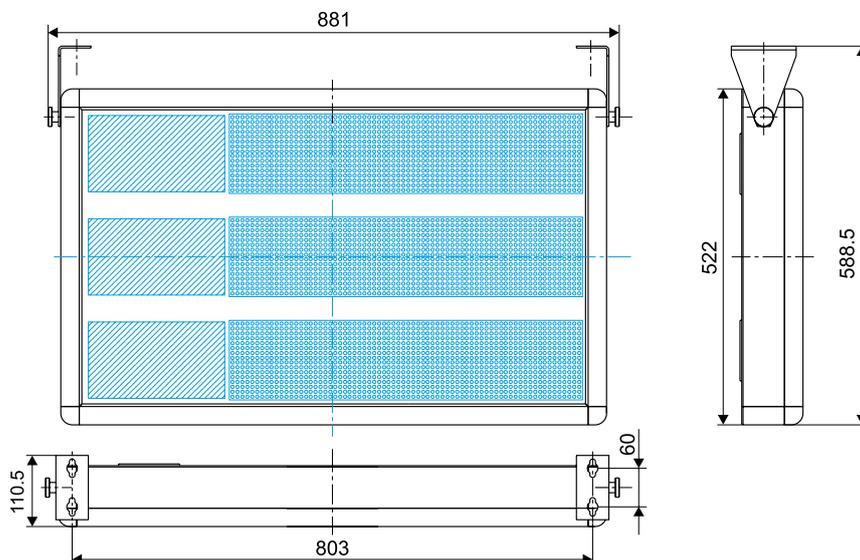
Overall dimensions of the panel and layout of holes and suspension clamps.
